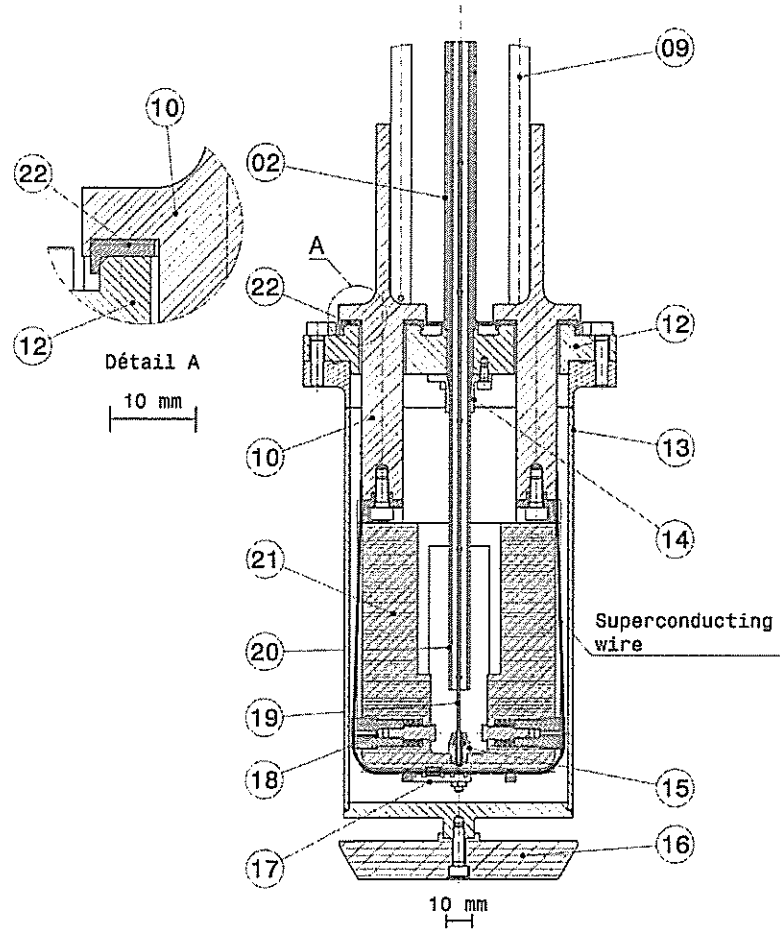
Cross-section of the vacuum chamber and the sample holder:
